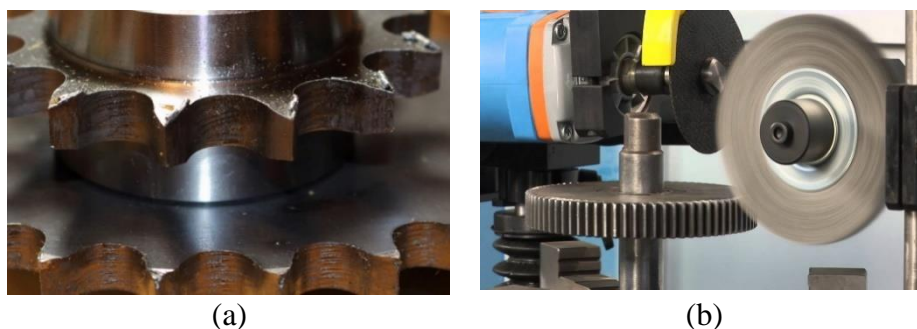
Rollover burr in gear, and (b) gear deburring tool for rollover burr [76]
